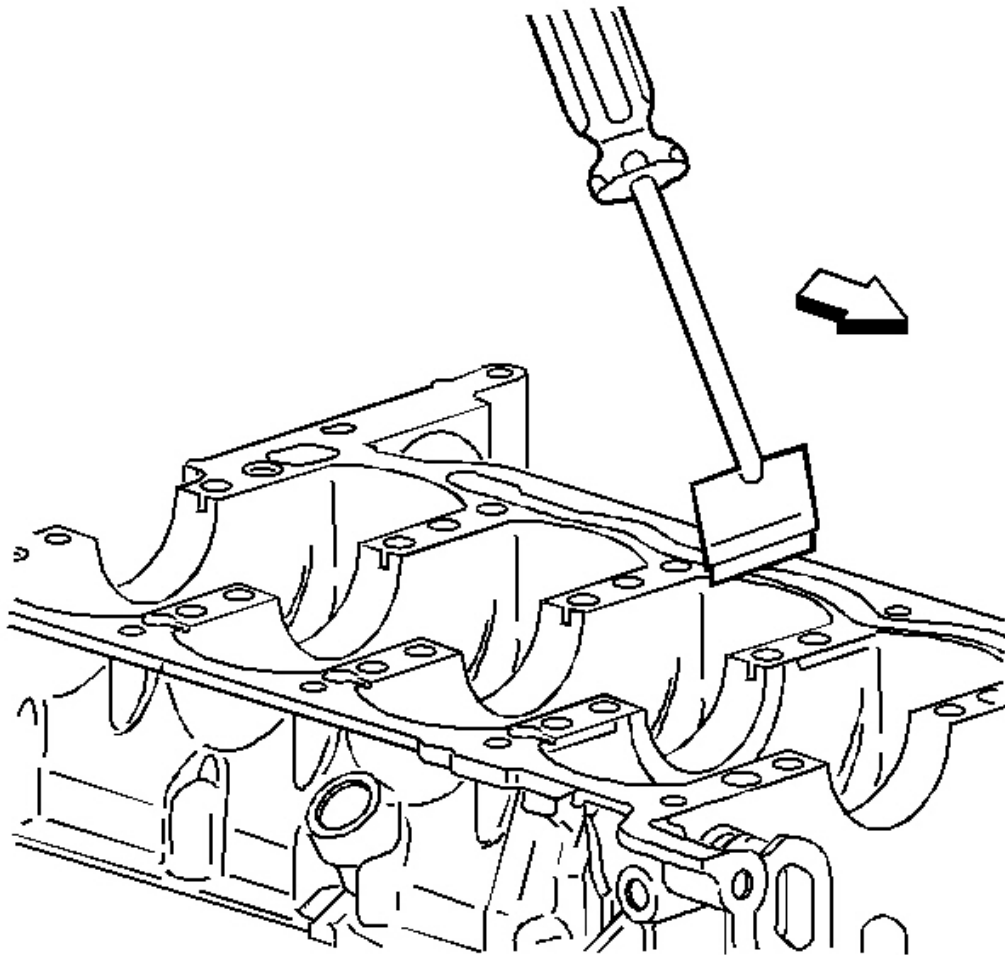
Cleaning Sealing Material From Gasket Mating Surfaces On The Lower Crankcase Engine Block Side
